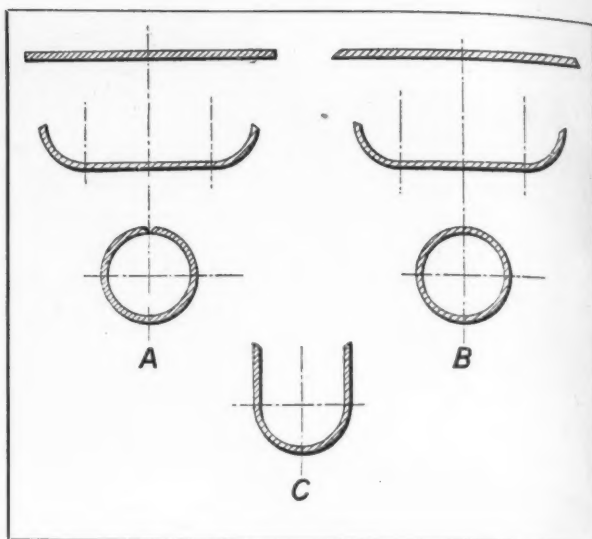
Successive Steps in Forming Strip Material into Cylindrical Sleeves
